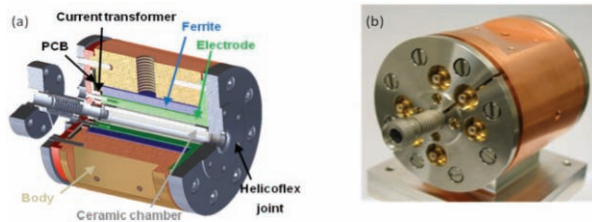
Nanometer BPM: (a) 3D drawing (b) Pictures of the final assembly.
